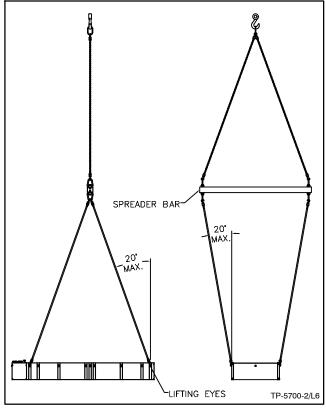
Fuel Tank with Single Spreader Bar Method
